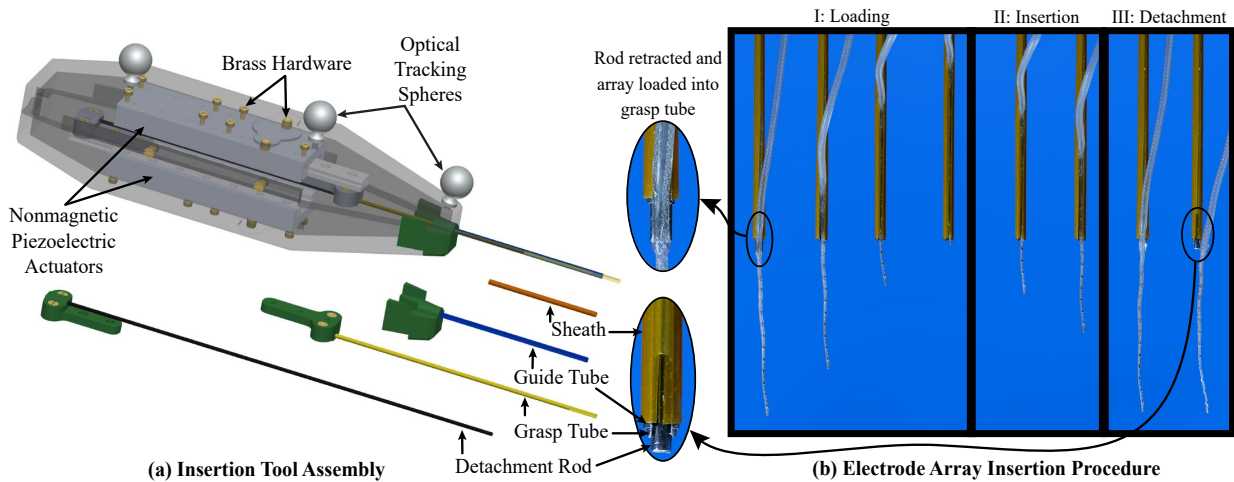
(a) Insertion tool assembly. The inner detachment rod and middle grasp tube are each attached to an actuator. The outer guide tube is connected to a detachable tip piece so that if an EA of a different diameter is to be used, it can simply be replaced with a tube of a different diameter. (b) Diagram showing tube operation for EA deployment. Step I: Loading- Load EA into the grasp tube slot and retract until the tip of the EA reaches the guide tube opening. Step II: Insertion- Insert EA by advancing the grasp tube and detachment rod simultaneously. The polyimide sheath constrains the tapered end of the EA during deployment. Step III: Detachment- Retract the grasp tube over the stationary detachment rod, which gently releases the EA from the grasp tube © 2020 IEEE.
